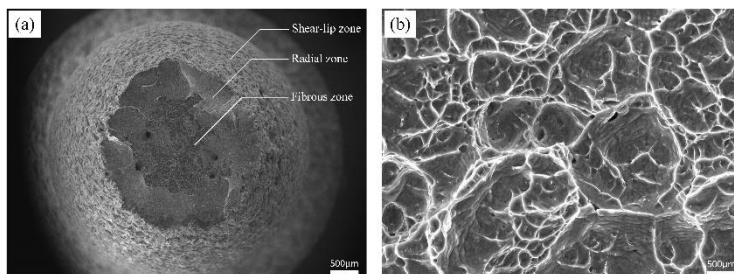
Fracture surface of β -Ti21S tensile test samples showing three zones typical of a ductile mechanism. (a) Overview and (b) Detail illustrating the fibrous.
